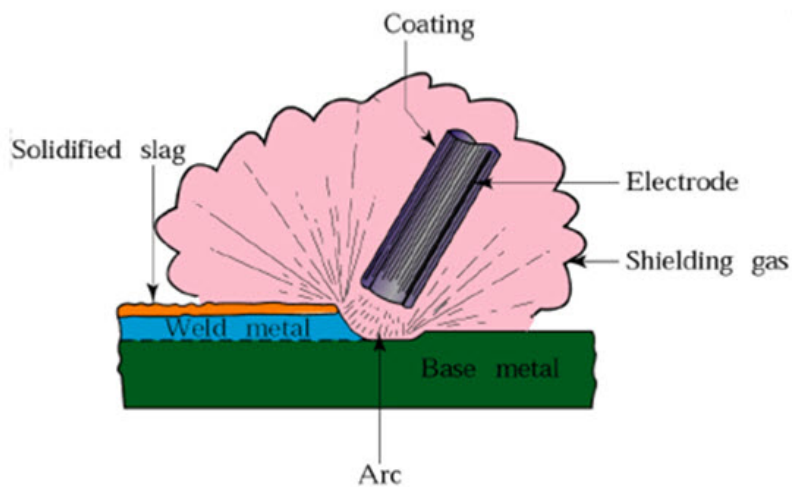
Schematic illustration of the shielded metal-arc welding process. About 50% of all large-scale industrial welding operations use this process.
